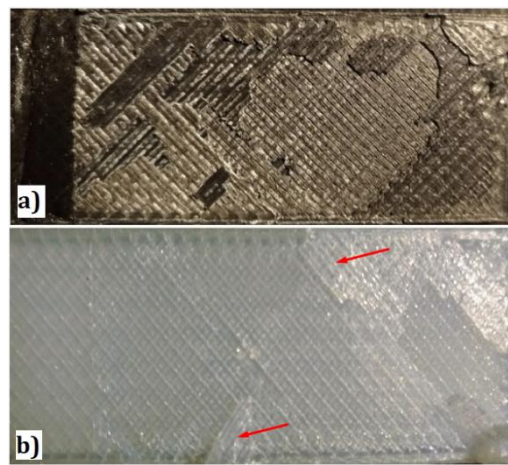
Resulting surfaces after the DCB test. a) PA12+sCF specimen. b) PA12 specimen.
